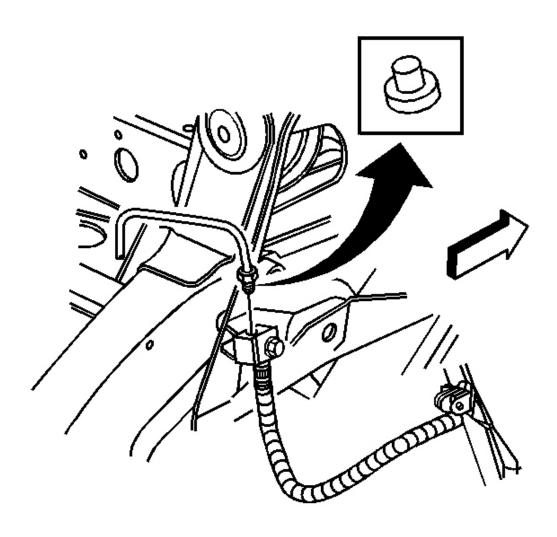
Brake Pipe Fitting Plug/Rubber Cap Removed Courtesy of GENERAL MOTORS CORP.
